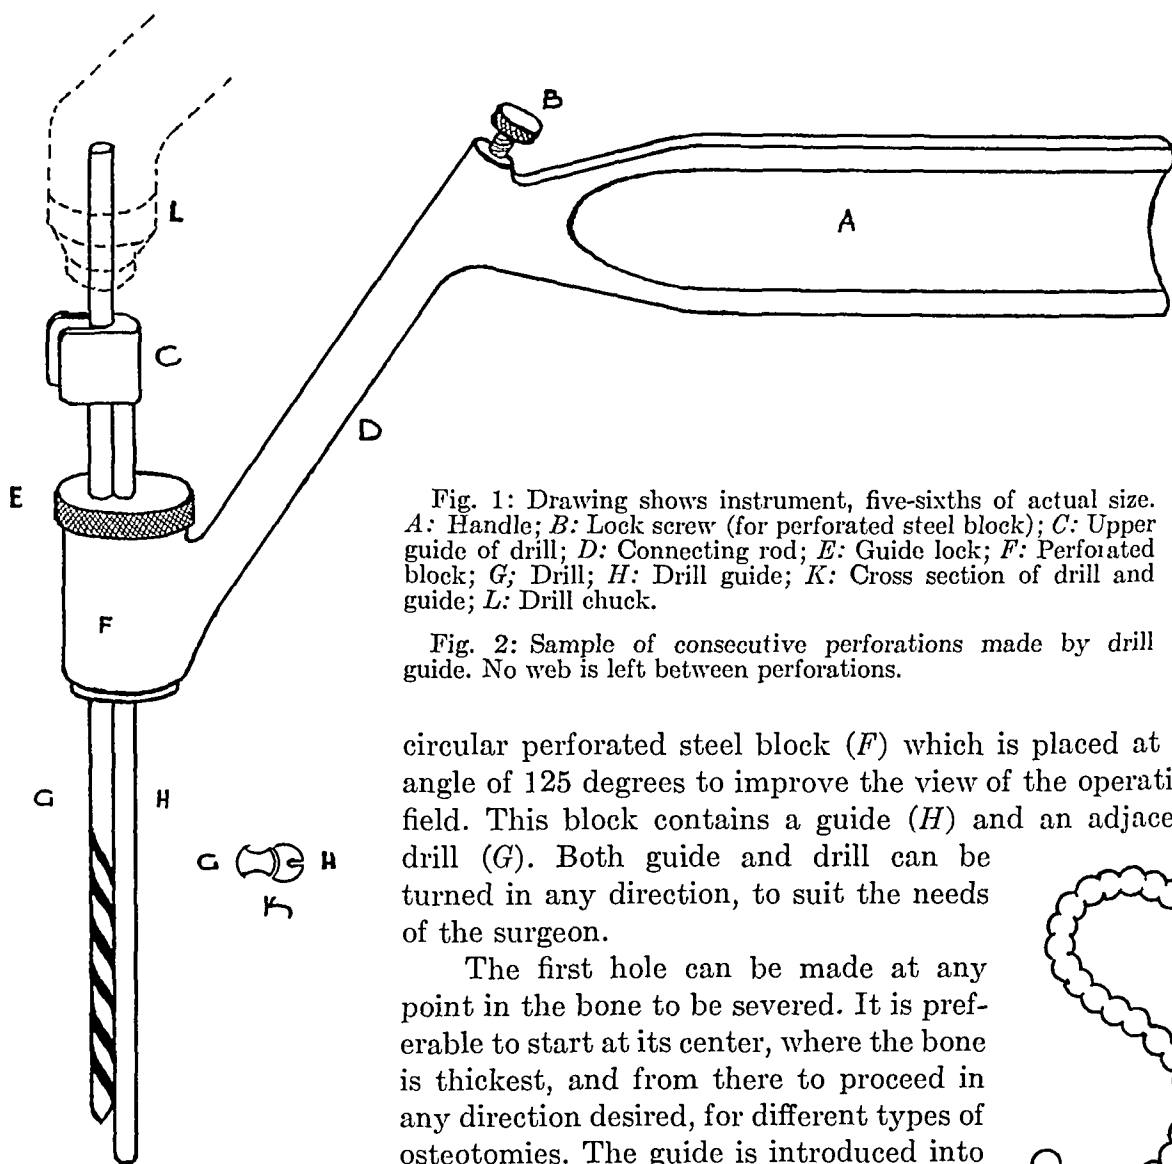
Drawing shows instrument, five-sixths of actual size. A: Handle; B: Lock screw (for perforated steel block); C: Upper guide of drill; D: Connecting rod; E: Guide lock; F: Perforated block; G: Drill; H: Drill guide; K: Cross section of drill and guide; L: Drill chuck.
